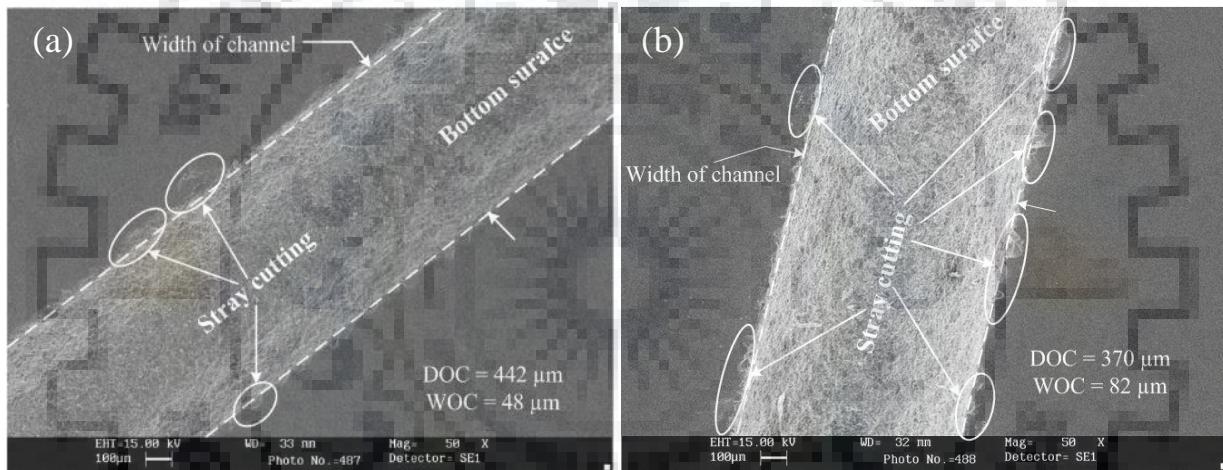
Machined microchannel using (a) WC tool (b) SS-304 tool [experimental conditions: rotation speed = 400 rpm, feed rate = 15 mm/min, power rating = 40%, concentration = 15% and machining time = 3 minutes]
